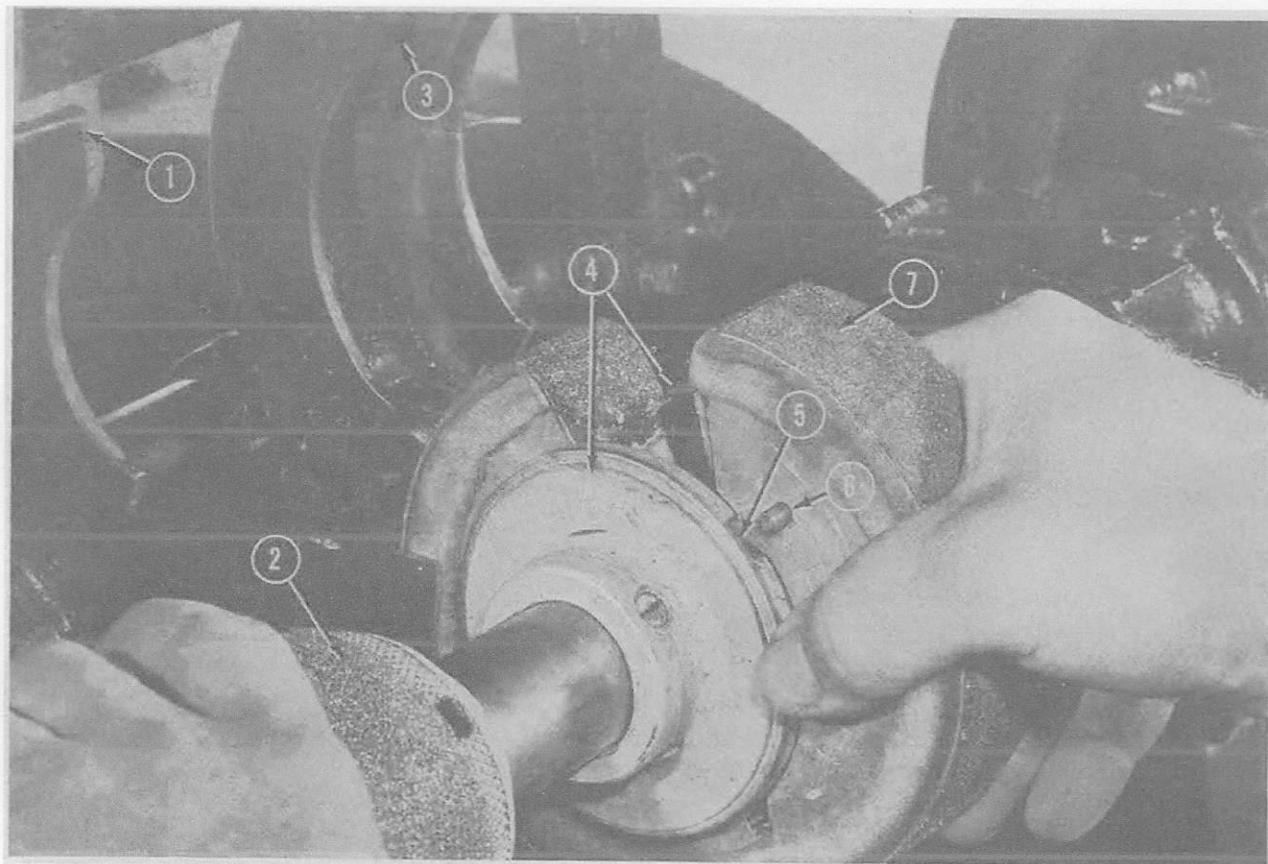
and the hood of the bottom sander (1). Turn upper shaft by hand until the opening joint of the heel sander is turned up and is facing the operator. Grasp bottom sander (2) with left hand to hold shaft securely. With right hand strike downward on lower segment of heel sander (7) to open segments in direction that shaft turns. When segments are loose in the collars (4) turn segments until segment pin (6) in segment coincides with notch (5) in collar. Lift segment up until the working space between the open ends of the segments is sufficient to remove paper. Lift ends of paper off the paper-retaining pin (1, 2, fig. 137) and remove paper from sanding wheel.
